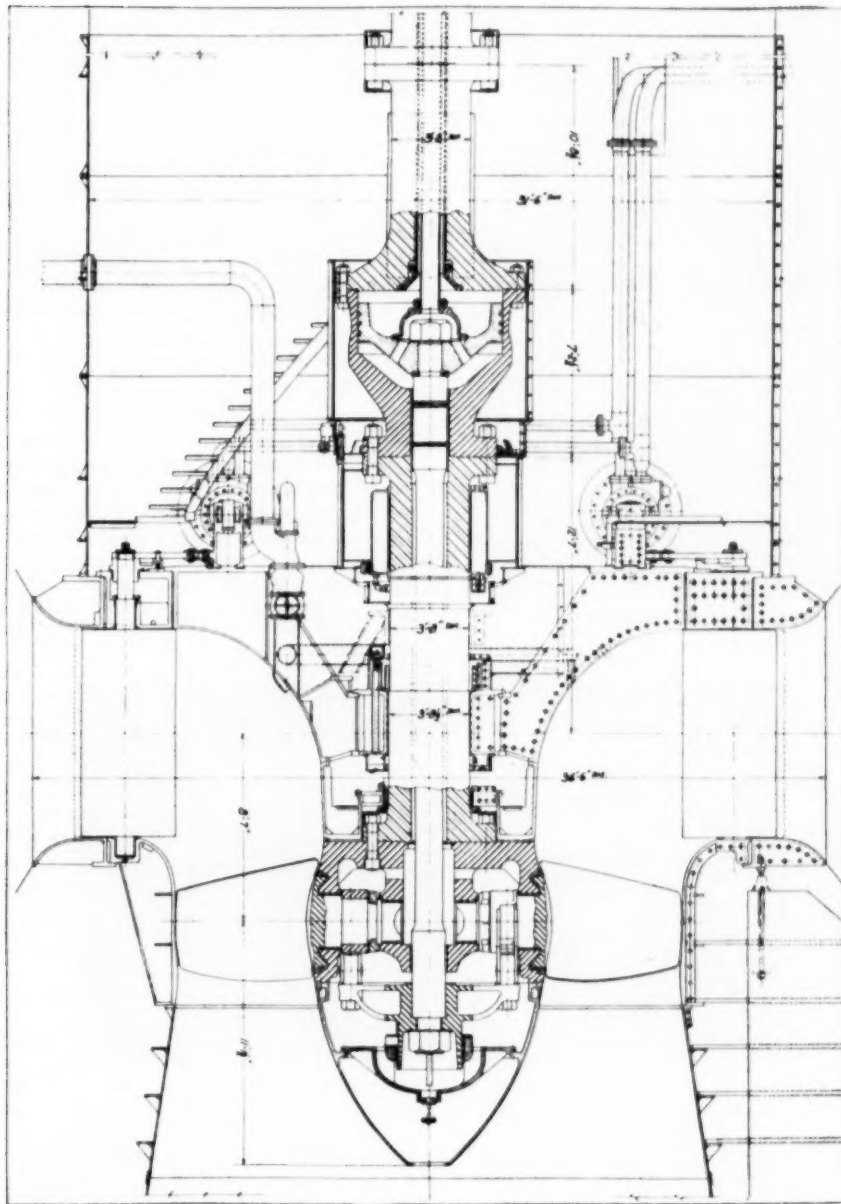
DISTRIBUTOR SECTION OF A LARGE KAPLAN UNIT
